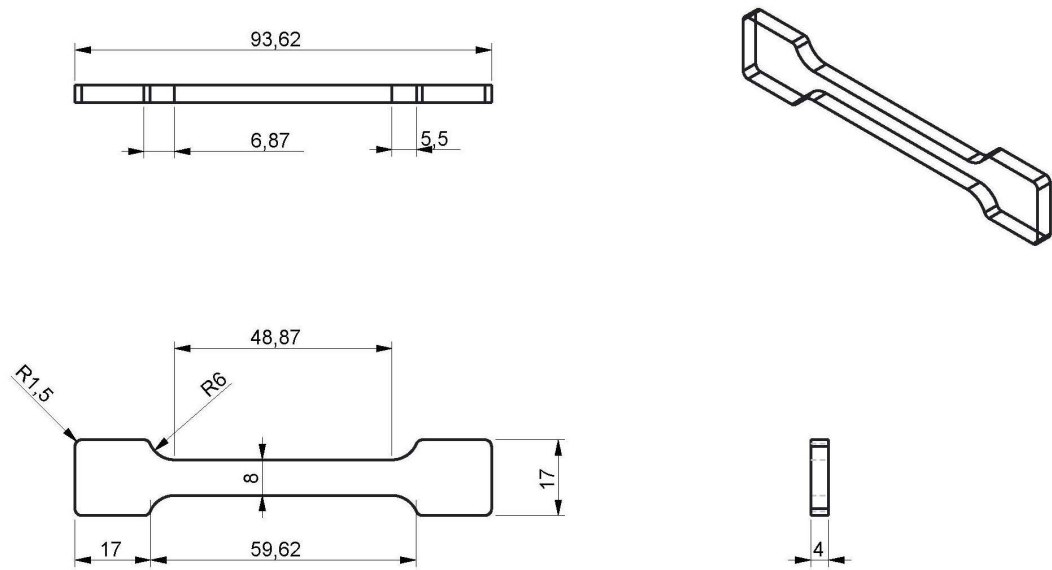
Tensile specimen geometry and dimensions - Specimen dimensions in millimetres, derived from ASTM standard (148).
